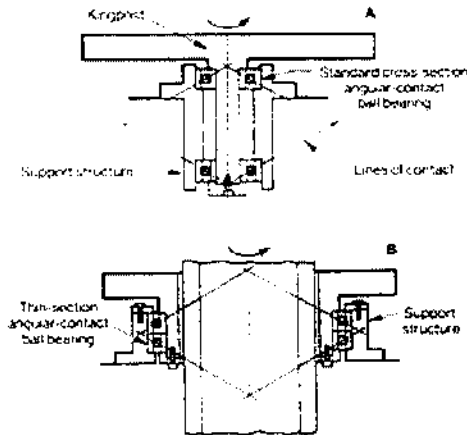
ROTATING KINGPOST ASSEMBLIES: CONVENTIONAL DESIGN, A, AND IMPROVED DESIGN USING THIN-SECTION BEARINGS, B.
